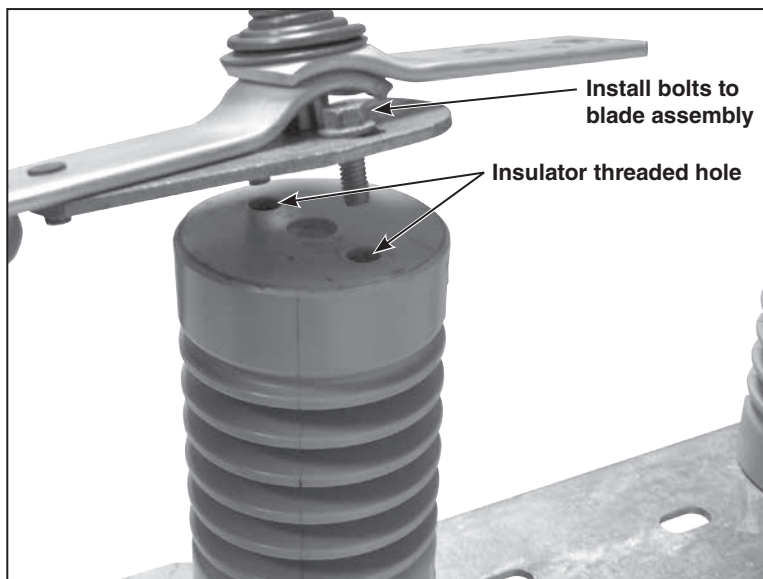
Insert the new bolts into the mounting plate. Hand-tighten the bolts until they are low enough to engage with a wrench.
